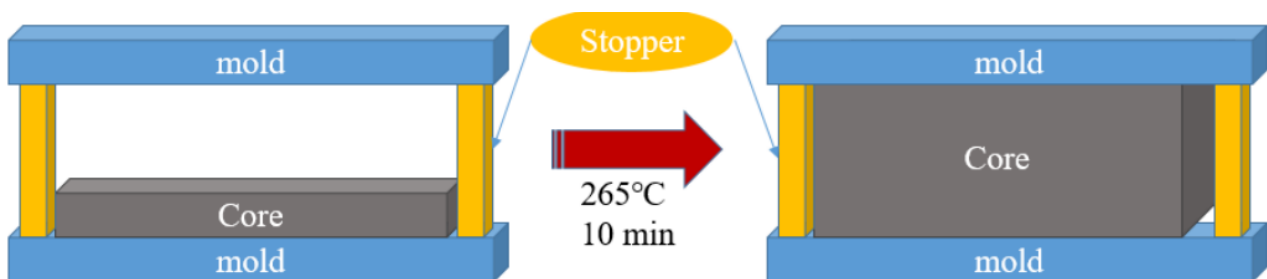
The process of springback for a PP core using a hot press machine [159]
